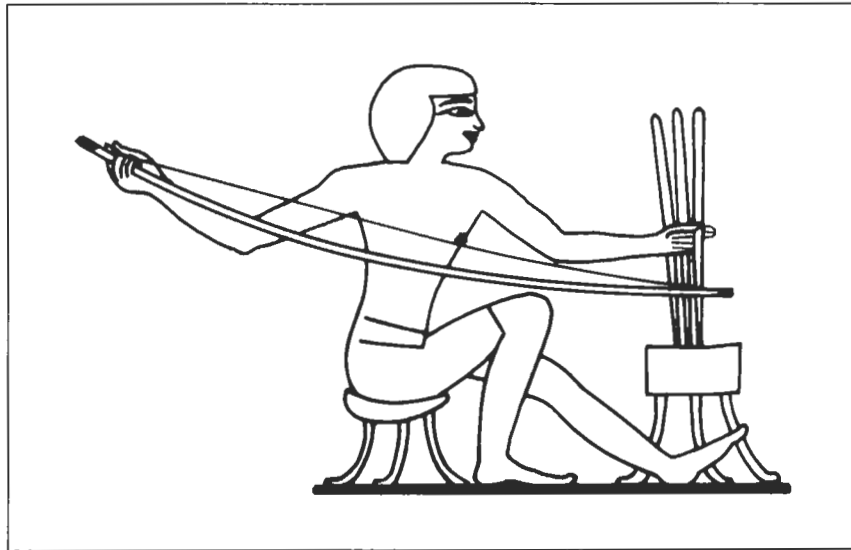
This Egyptian drawing shows an early technique for drilling holes in stone which involved the bow drill. The bow caused the drill bit to revolve, thereby boring a hole into the stone. Modern historians surmise that this same equipment was also probably used to engrave gems.
